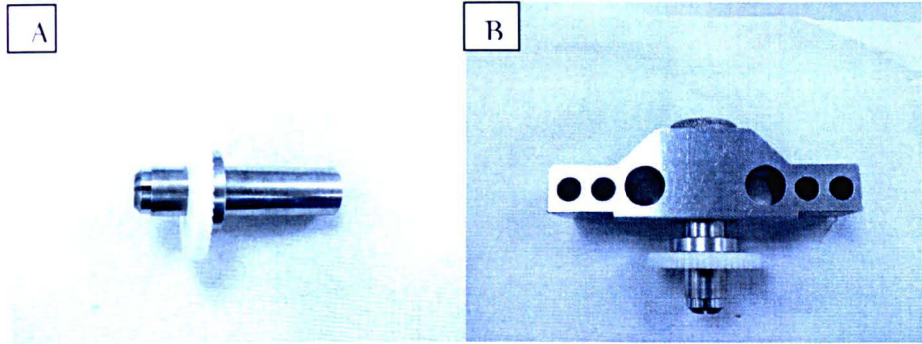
A) Polymer gear wheel slotted through a pin holder and B) A pin holder with polymer gear wheel slotted through a bridge
